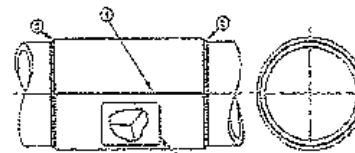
Shielding Gas TIG Welding of Repair Patches
